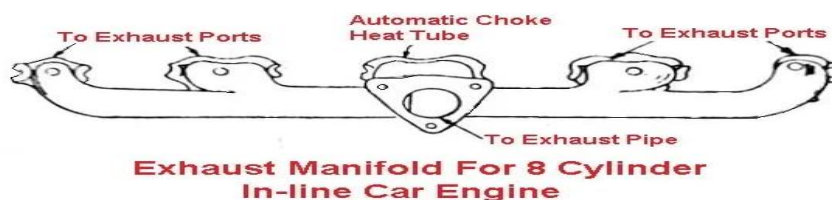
Exhaust Manifold for 8 cylinder In line Car Engine
